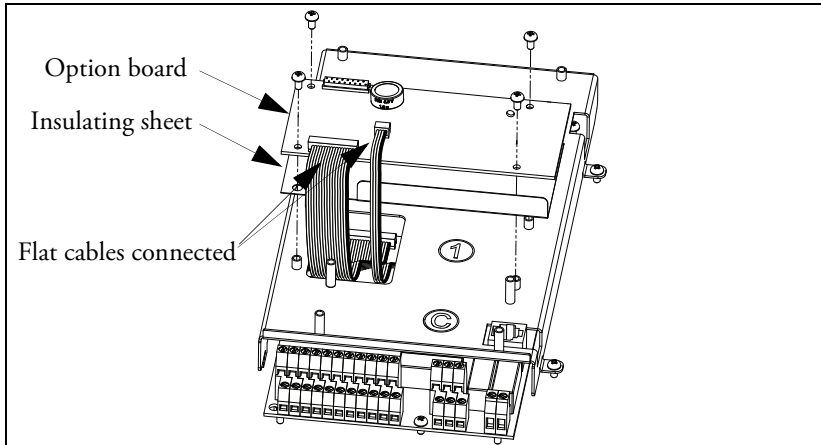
Lead the cables through the rectangular hole and mount the option plate.
